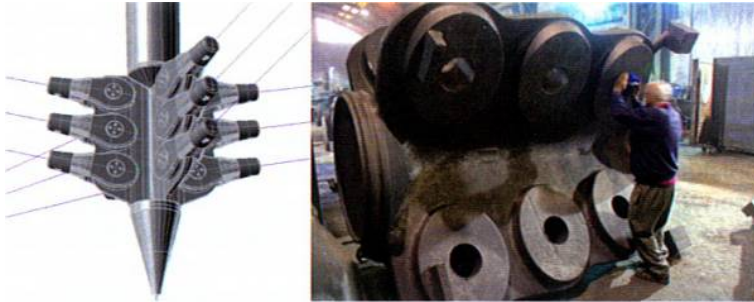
Cast steel footing – the heaviest connector of the cable system – weight 18 t
